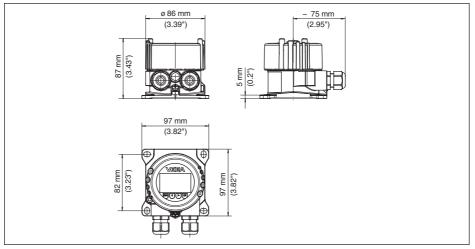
VEGADIS 82, with stainless steel housing (precision casting)
